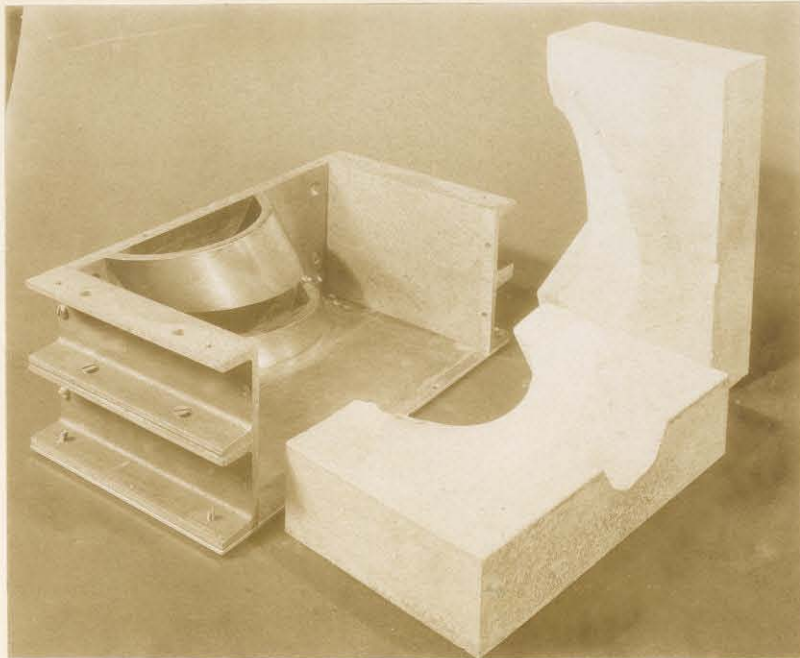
Mold box with slotted hub piece and plaster mold halves.
